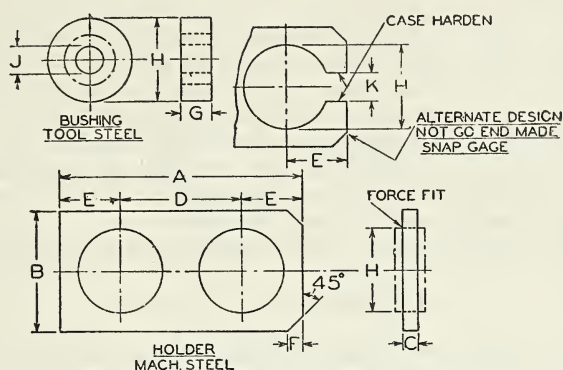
American Gage Design Standard twin ring gage, details of construction.
